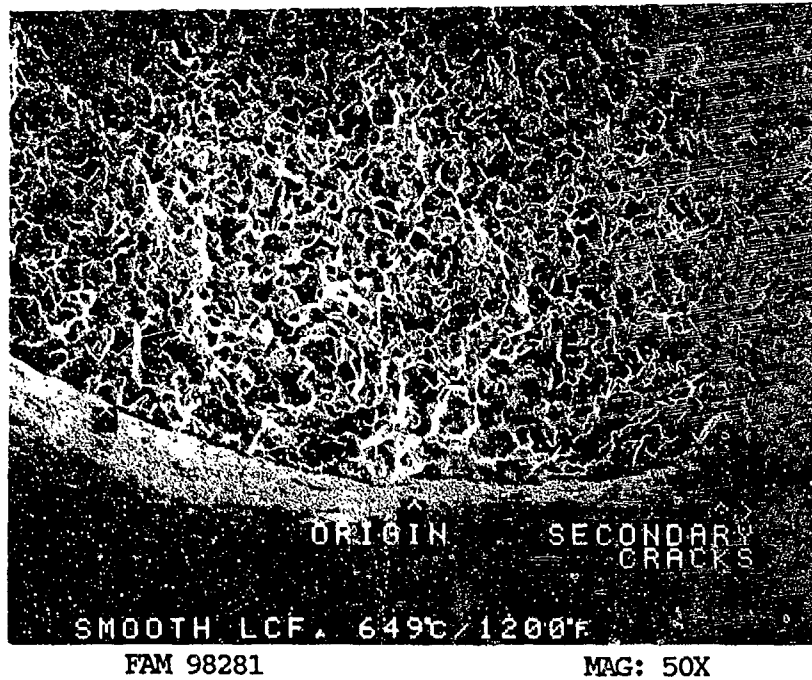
Low magnification view showing several fatigue origins and secondary cracking on the outside surface of the specimen. The fracture surface appears to be oxidized.
